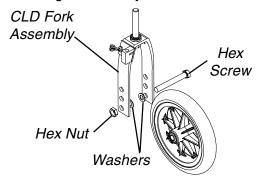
MOUNTING CASTER TO CLD FORK ASSEMBLY
